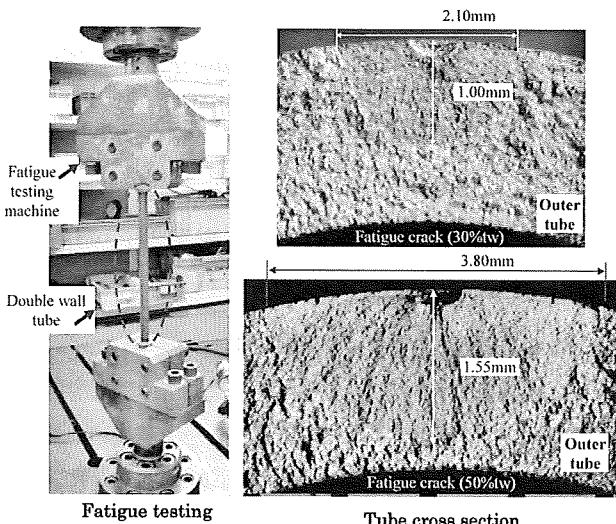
Fatigue testing and cross sectional view of cracks.
